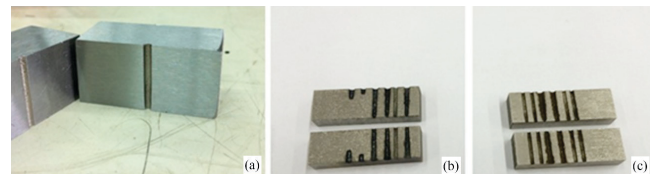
Drilled workpiece halves: a) AISI4140, b) Ti64, c) In718
